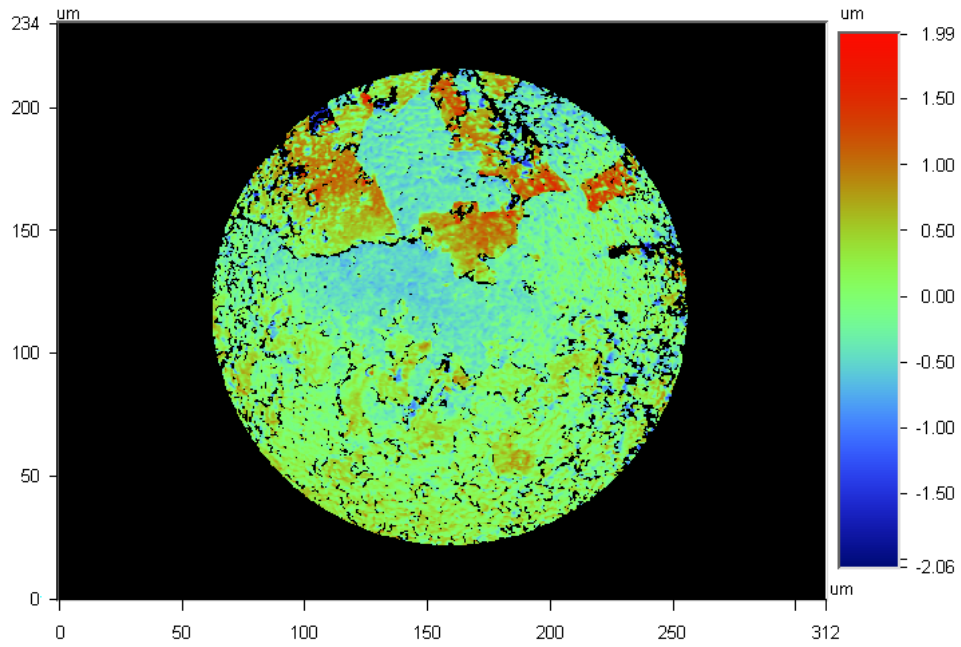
Surface Topology of Ball from Bearing with Oil that Operated after Failure
